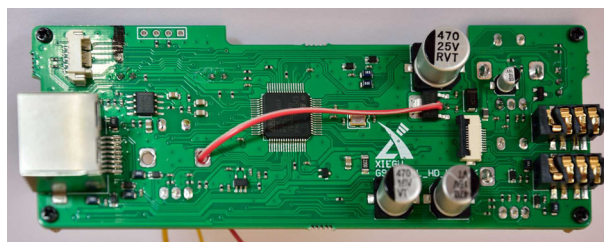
Red wire soldered to the 3.3 V regulator and routed through encoder mounting hole.
